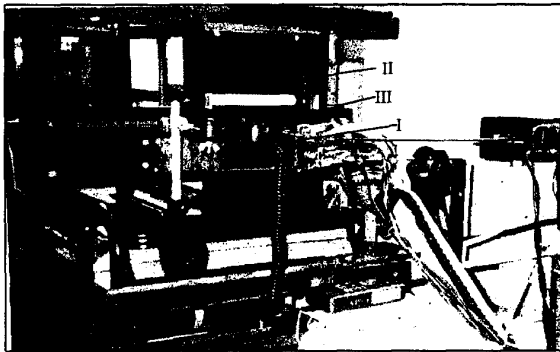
Experimental model (I Inductor ; II Workpiece; III Measurement instrument)
